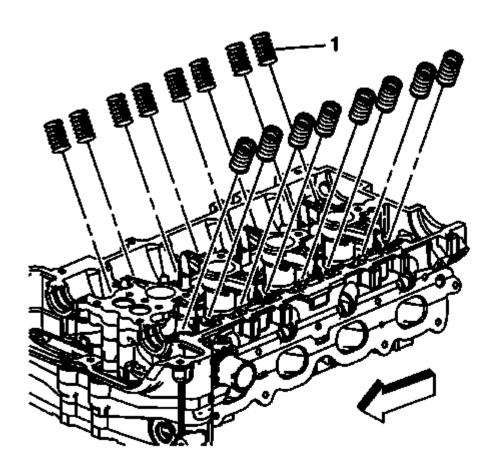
Valve Springs Courtesy of GENERAL MOTORS COMPANY
